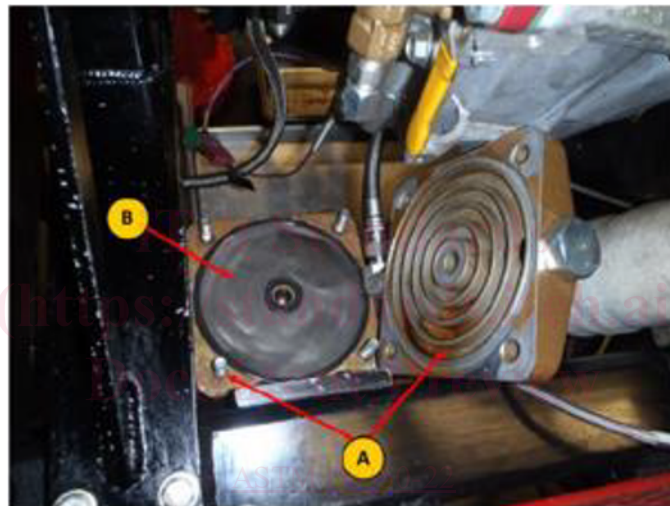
Disassembled Oberg Filter Housing (A) with Filter Element (B)
